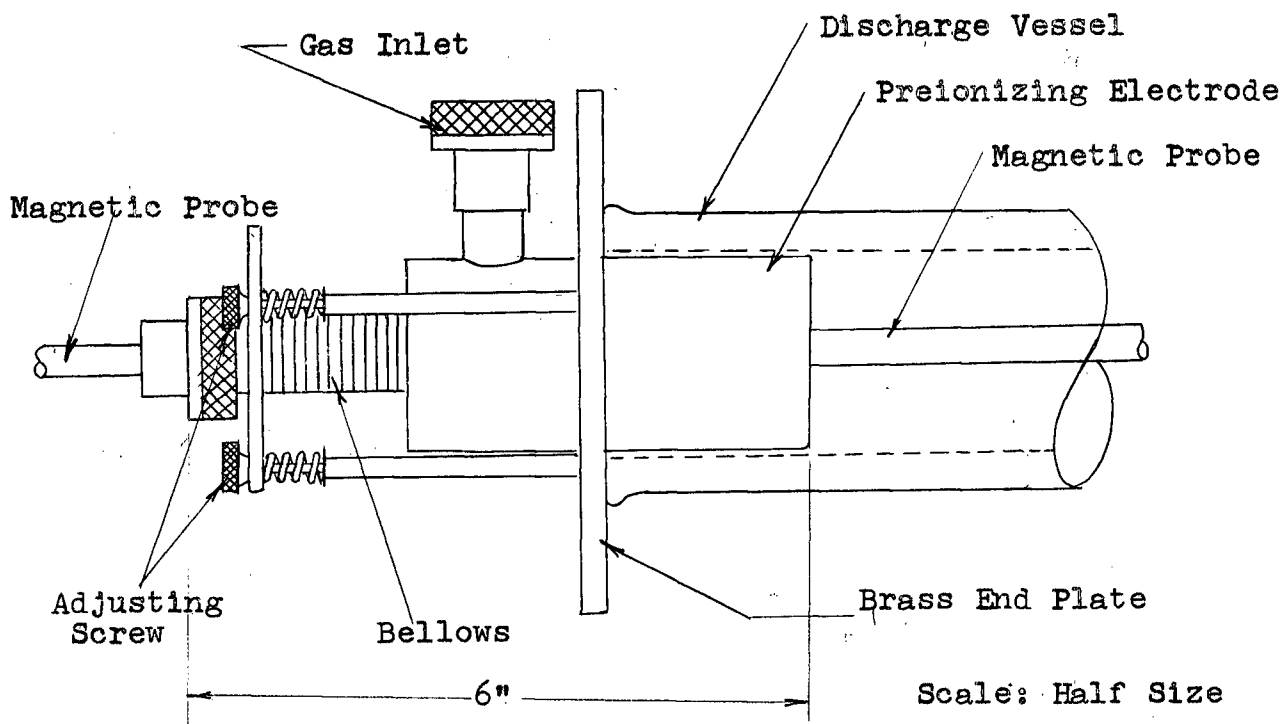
Method Of Mounting Probe In The Theta Pinch Discharge Vessel
